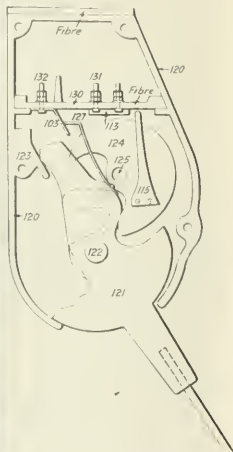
Circuit Controller Box; Cover Removed Fig. 1a—Circuit-Control Apparatus
